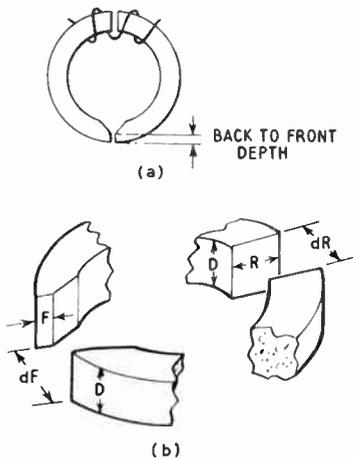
(a) Plan view of a typical magnetic head. (b) Dimensioned, exploded view of same head.
